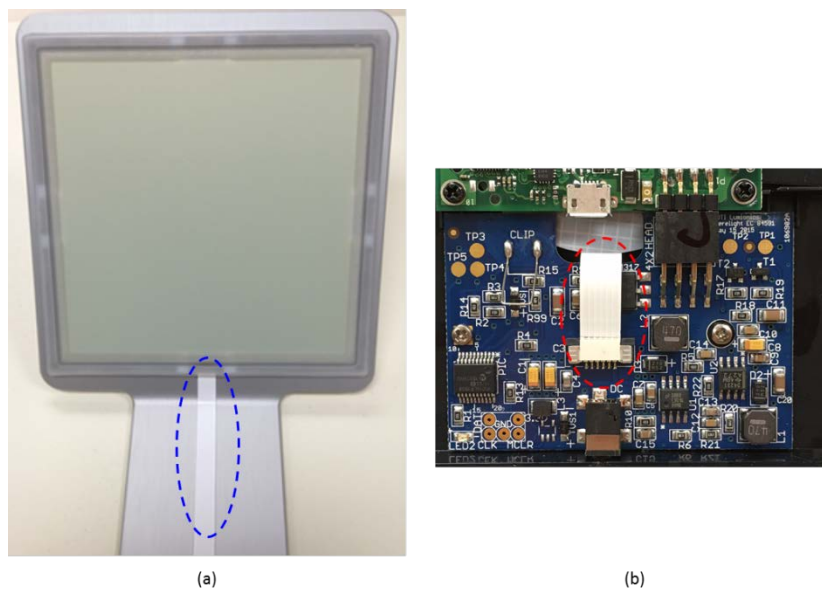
CALiPER 15-13 desk lamp showing (a) the OLED and flex cable (blue ellipse) running along the panel exterior and (b) the flex cable connected to the driving printed circuit board (red ellipse).
